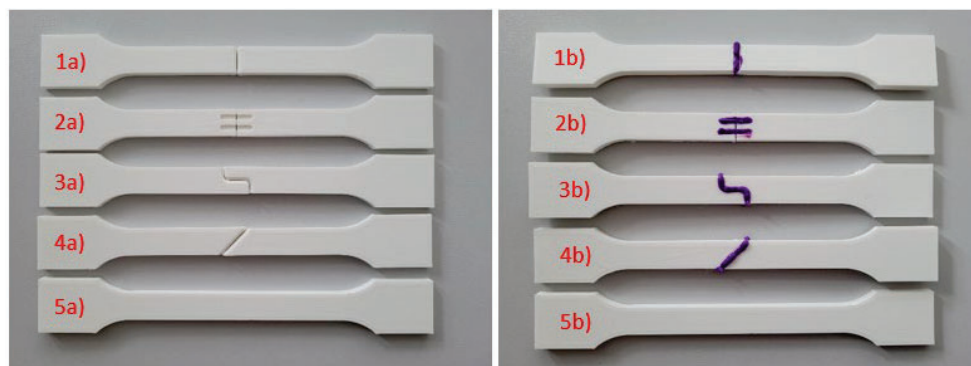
Test specimen for the tensile strength test: 1) v-notch, 2) 3-notch, 3) s-notch, 4) d-notch, 5) fully printed part; a) unwelded, b) welded
